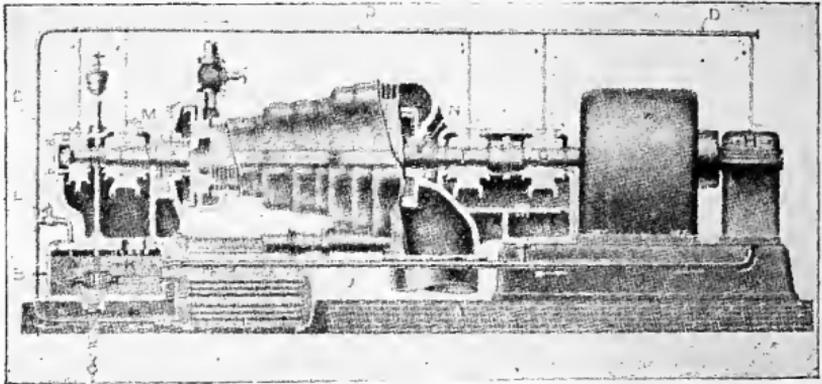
Section of Modern Steam Turbine, Showing Scheme of Operation of Self-Contained Oil Circulating System
